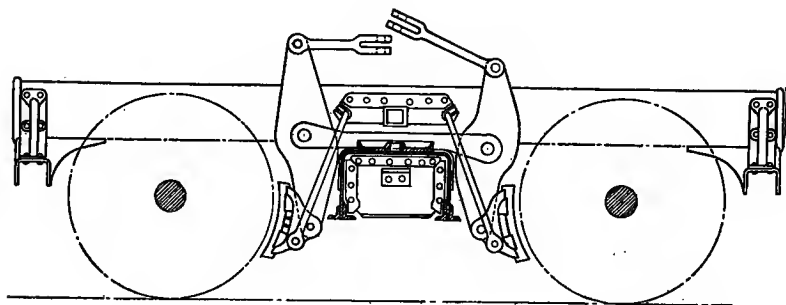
BRAKE RIGGING, THE STANDARD AS MODIFIED FOR TEST
